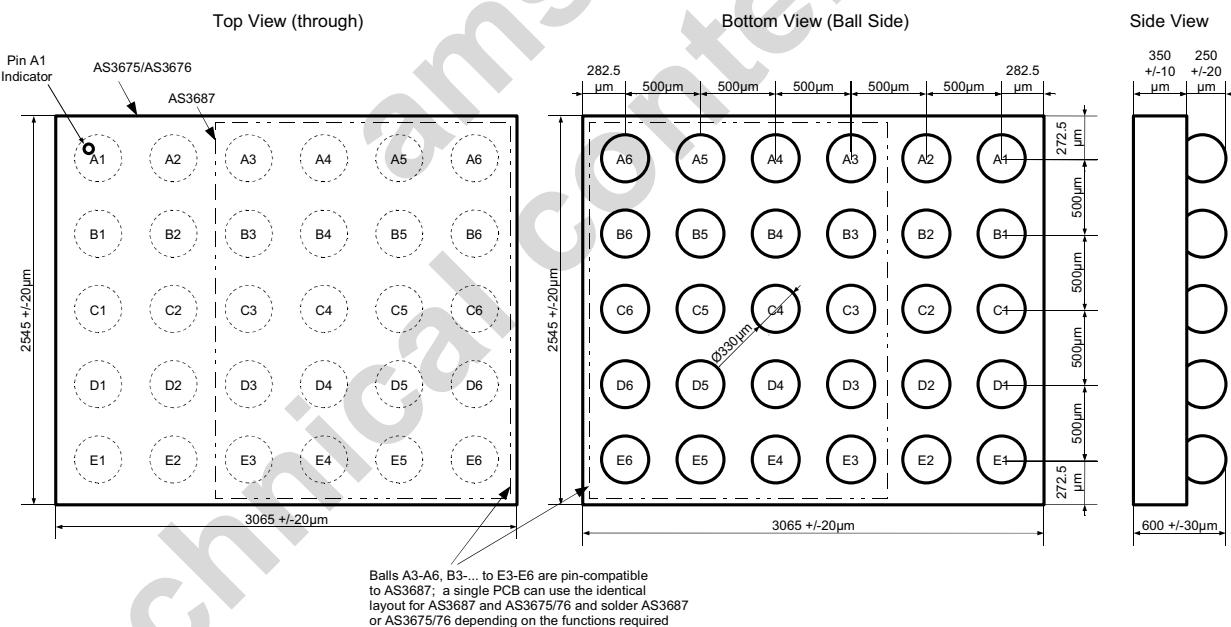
WL-CSP30 3x2.5mm 6x5 Balls Package Drawing
